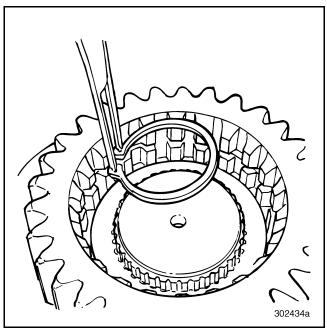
Installing Snap Ring onto Front of Shaft (T313L21/T318L21 Shown)
